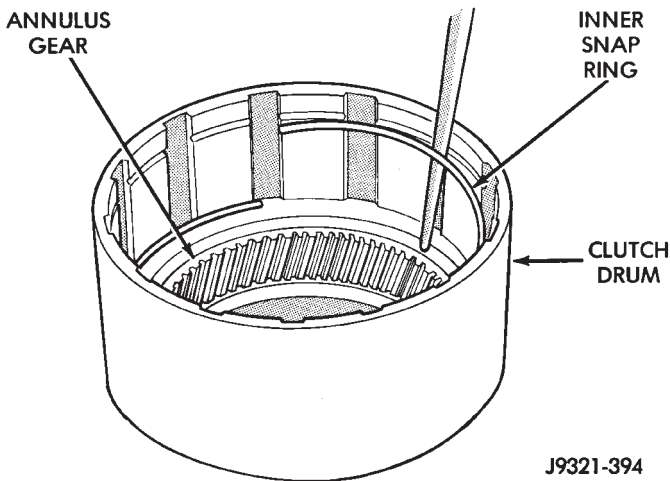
Clutch Drum Inner Retaining Ring Installation
